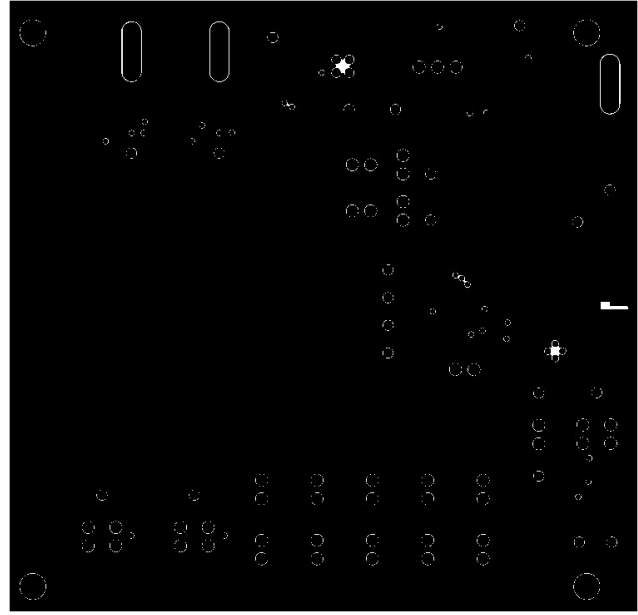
MAX3701 EV Kit PC Board Layout - Ground Plane
